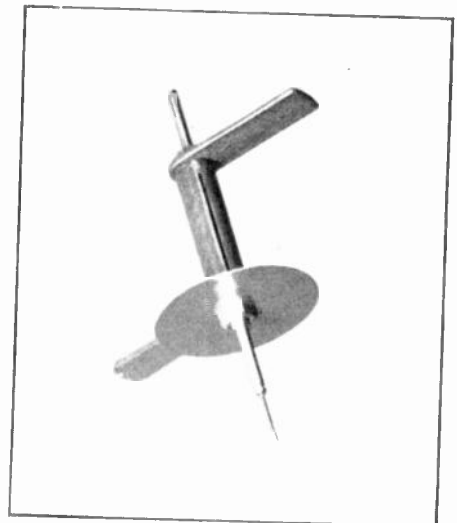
THE SHAFT ASSEMBLY HAS STEEL PIVOTS, TURNING ON JEWEL BEARINGS
